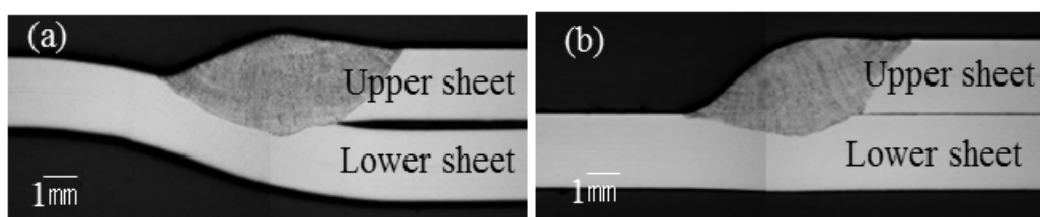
Cross section of specimens. (a) Joggled lap joint, (b) conventional lap joint.
